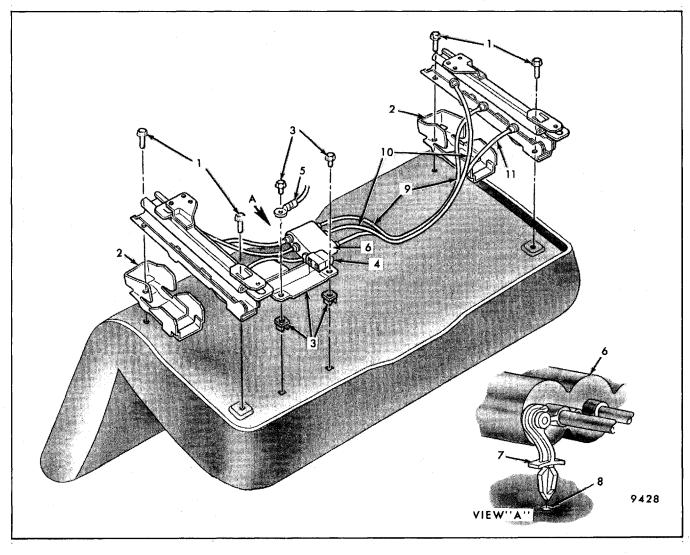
A, B and C Style Power Six-Way Seat Adjusters - Full Width Seat
